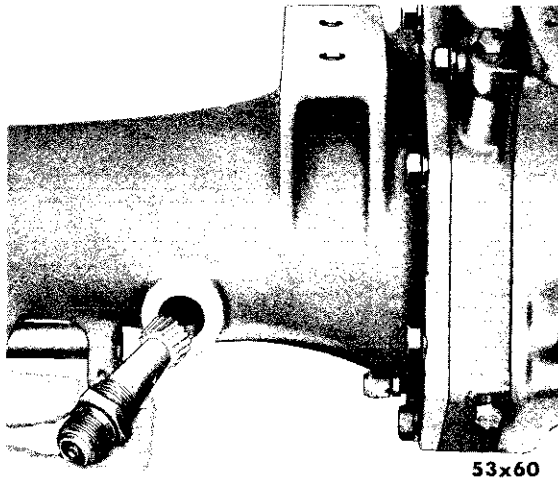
Removal and Installation of Speedometer Drive Pinion Assembly
